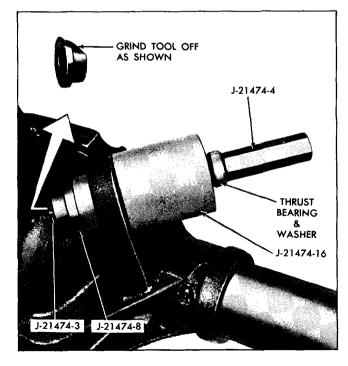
Removing Upper Control Arm Rear Bushing (Coil Spring Suspension)
